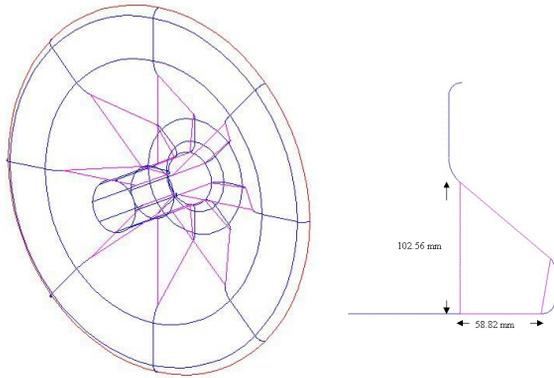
Left part, location of the 8 supports (in pink) & right part, dimensions of a support.
